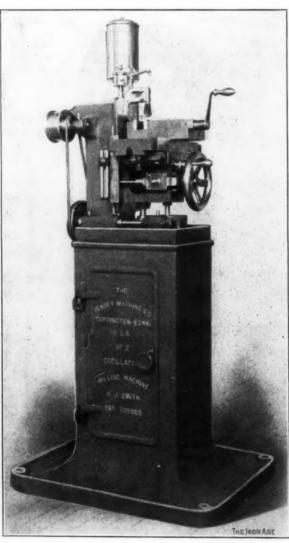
The No. 2 Hendey Oscillating Milling Machine.
